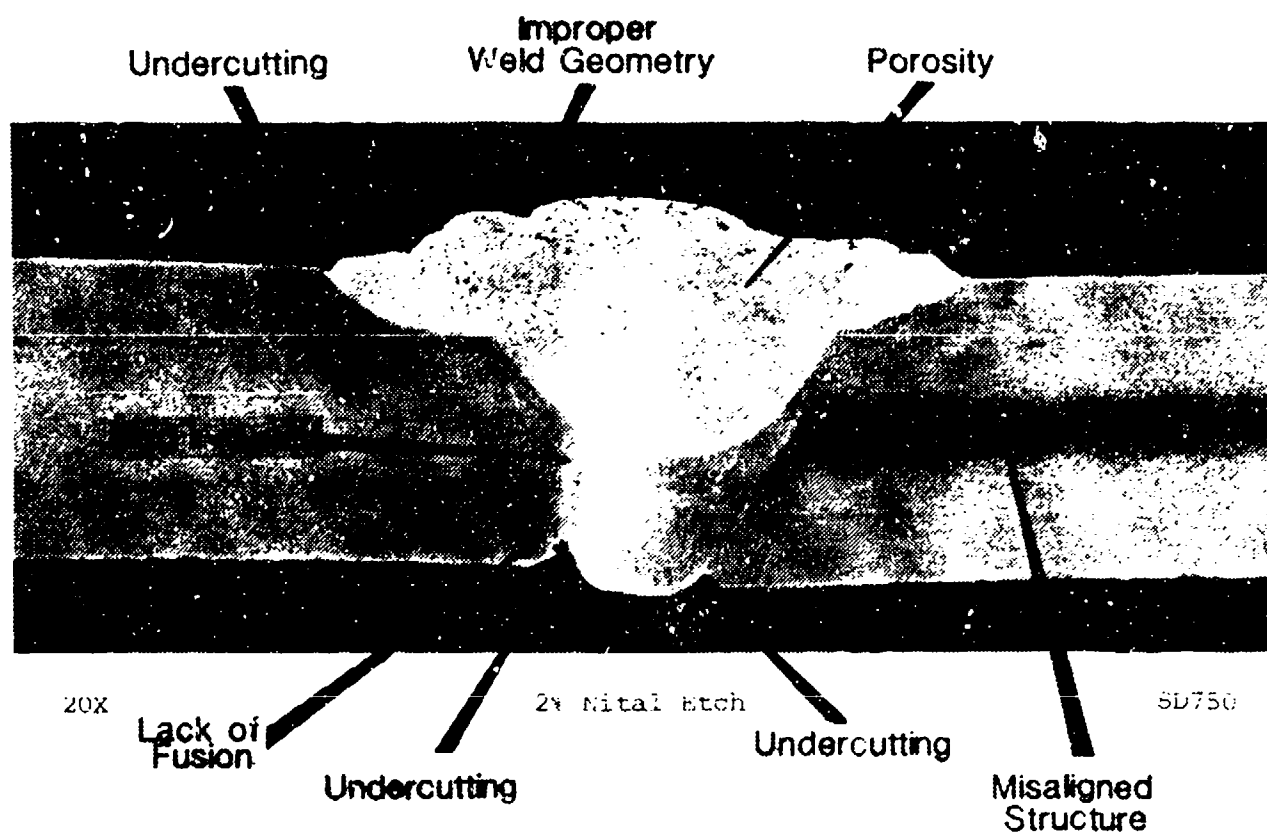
Example of Improper Butt Weld Showing Root Bead Undercutting, Slag Inclusions, Lack of Fusion and Porosity
